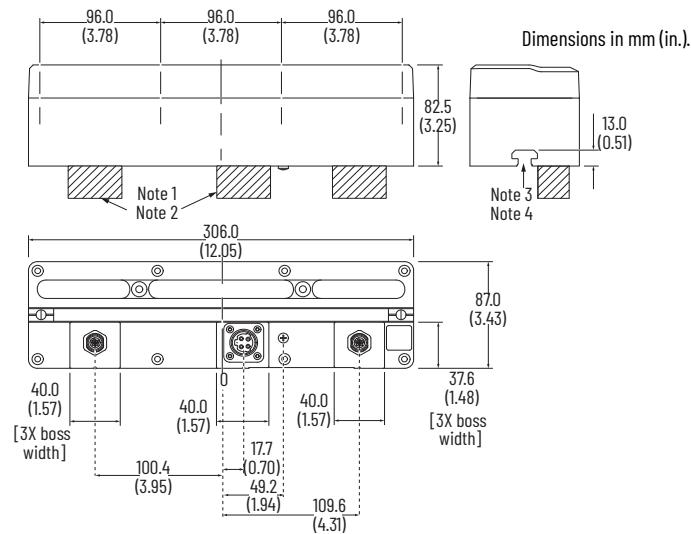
(MMI-QS-S10E03) Mechanical Drawing 0.3 Meter Motor
